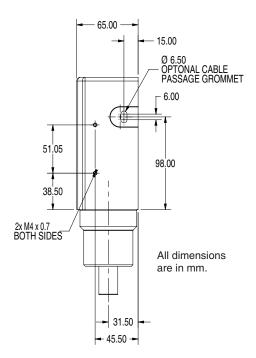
LT1 (Theta) Module Envelope/Mounting Hole Dimensions (Side View)
